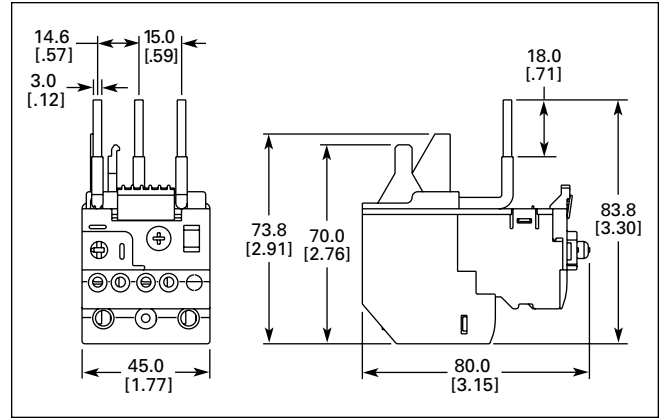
45 mm C396 (9 – 45A) Direct Connect to XT Frame D Contactor — Approximate Dimensions in mm [in]
